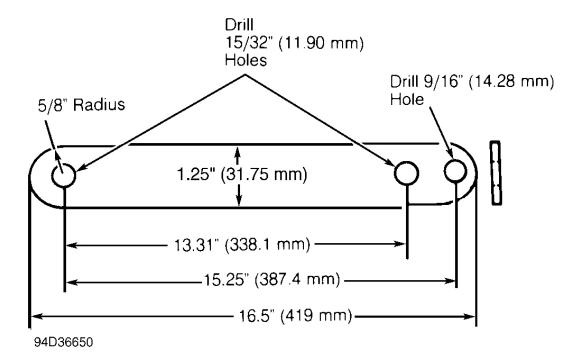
Fabricating Torque Converter Hub Seal Cup Retaining Strap Courtesy of CHRYSLER LLC
